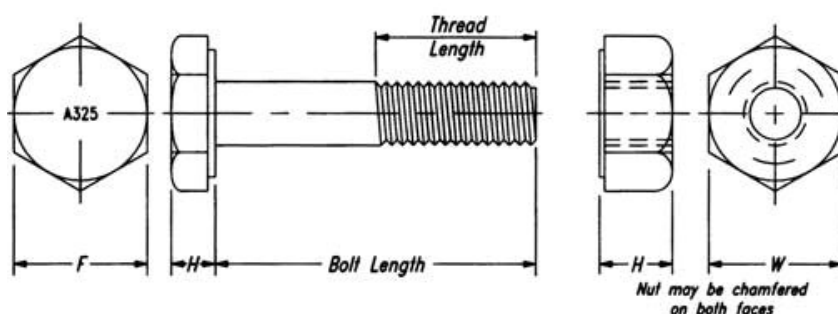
Heavy-hex structural bolt and heavy-hex nut.
